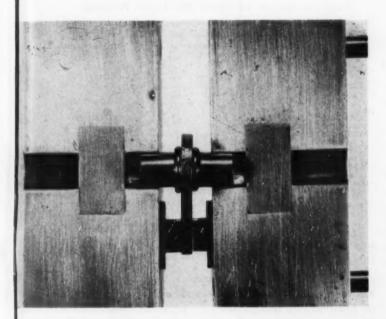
Upset welder dies showing a flat blanked part riveted to bar by means of electric upsetting on each side of a hole
